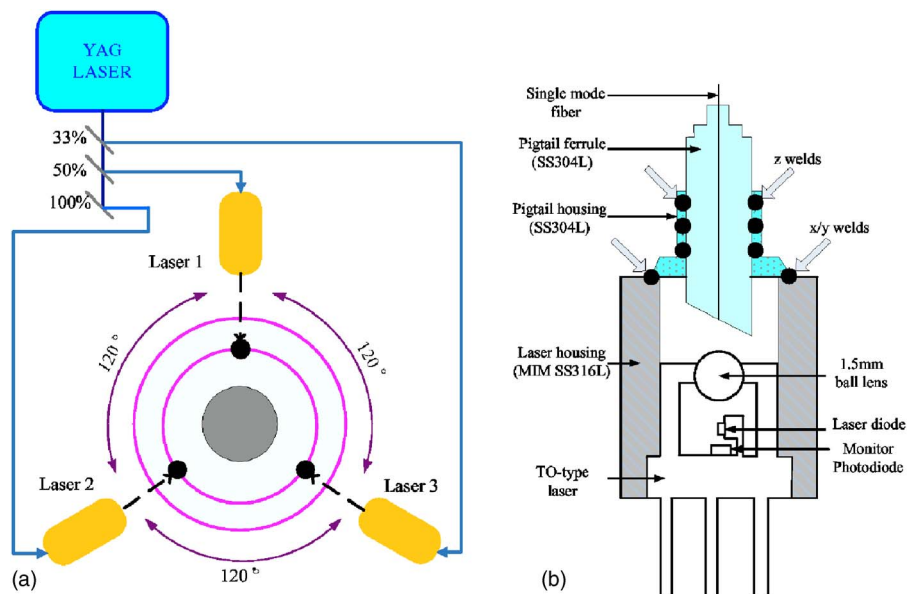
(a) Schematic diagram of the laser welding system. (b) Configuration of the cylindrical-type laser module.
